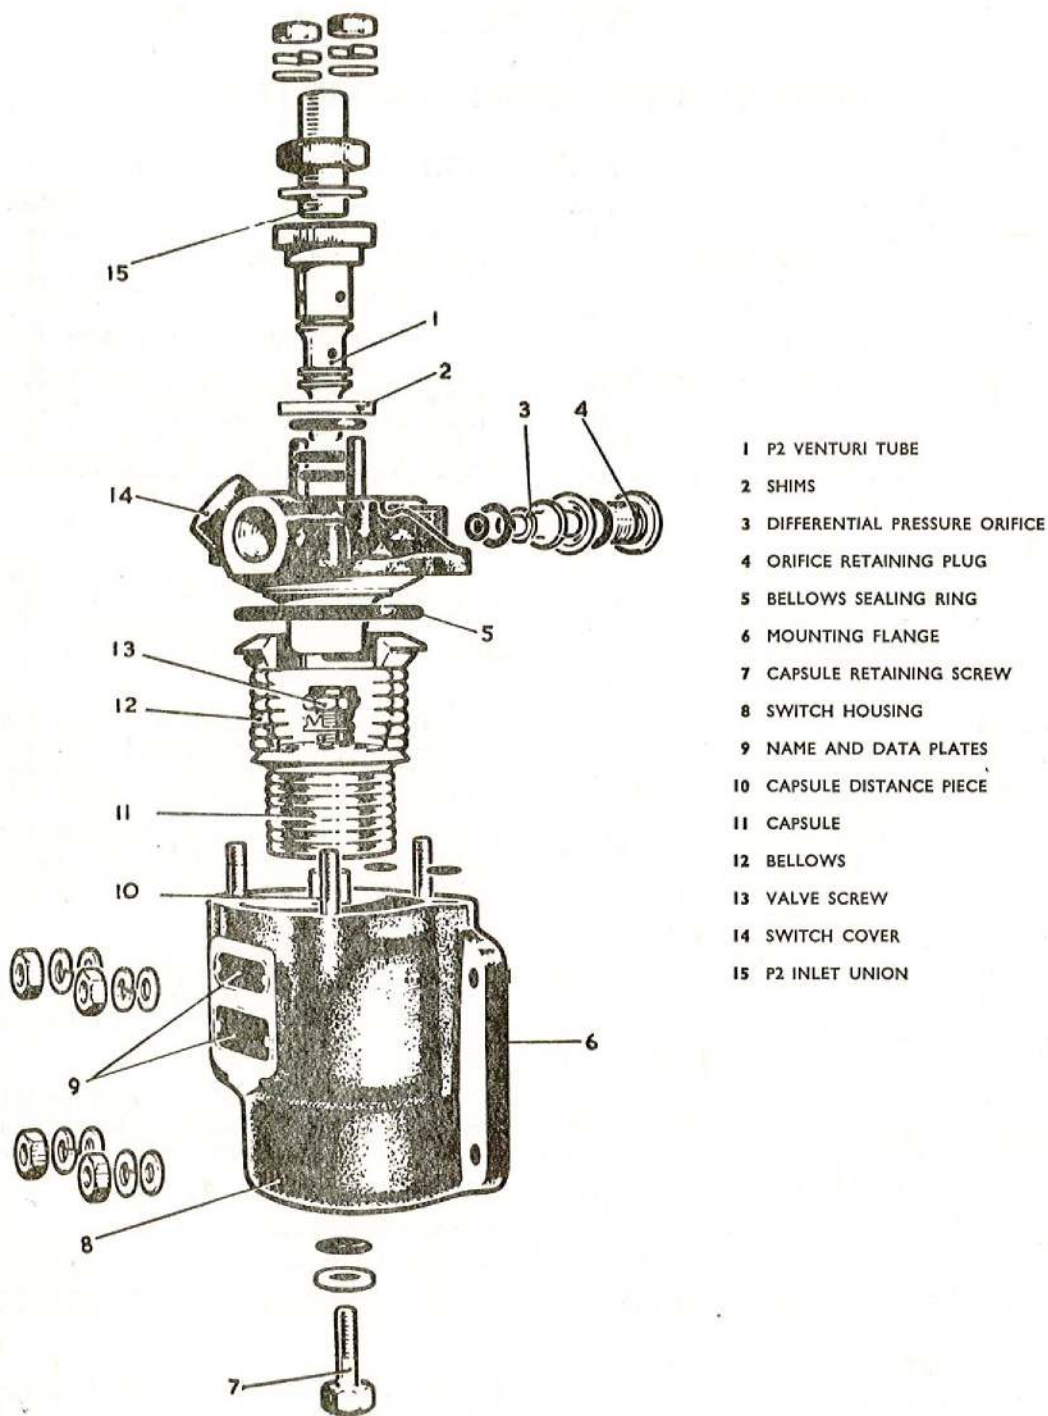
Exploded view of pressure ratio switch (venturi type)
